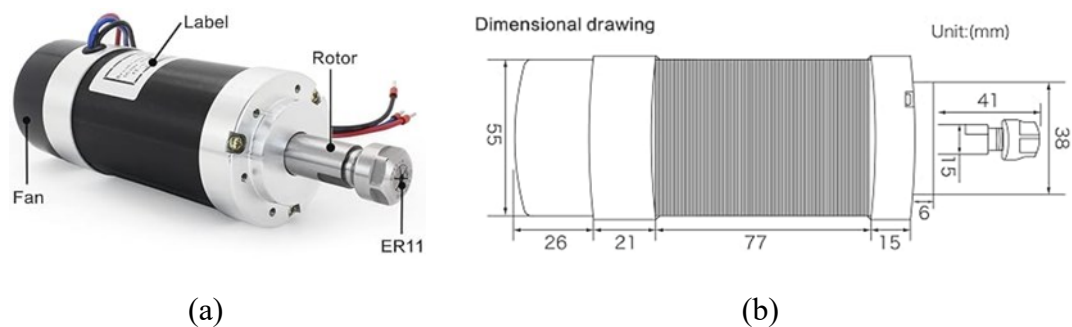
(a) Air-cooled CNC spindle, (b) along with its dimensions
